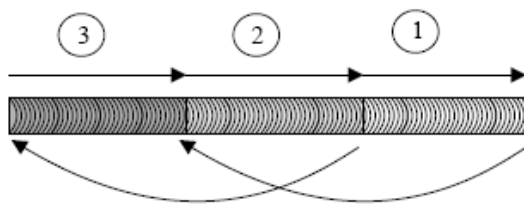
c Welding sequence for cracks with length less than 300 mm
